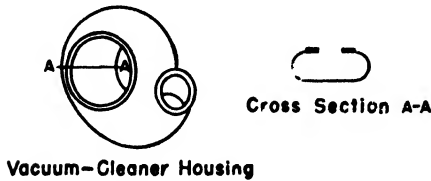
Collapsible core used for casting a vacuum cleaner housing.
